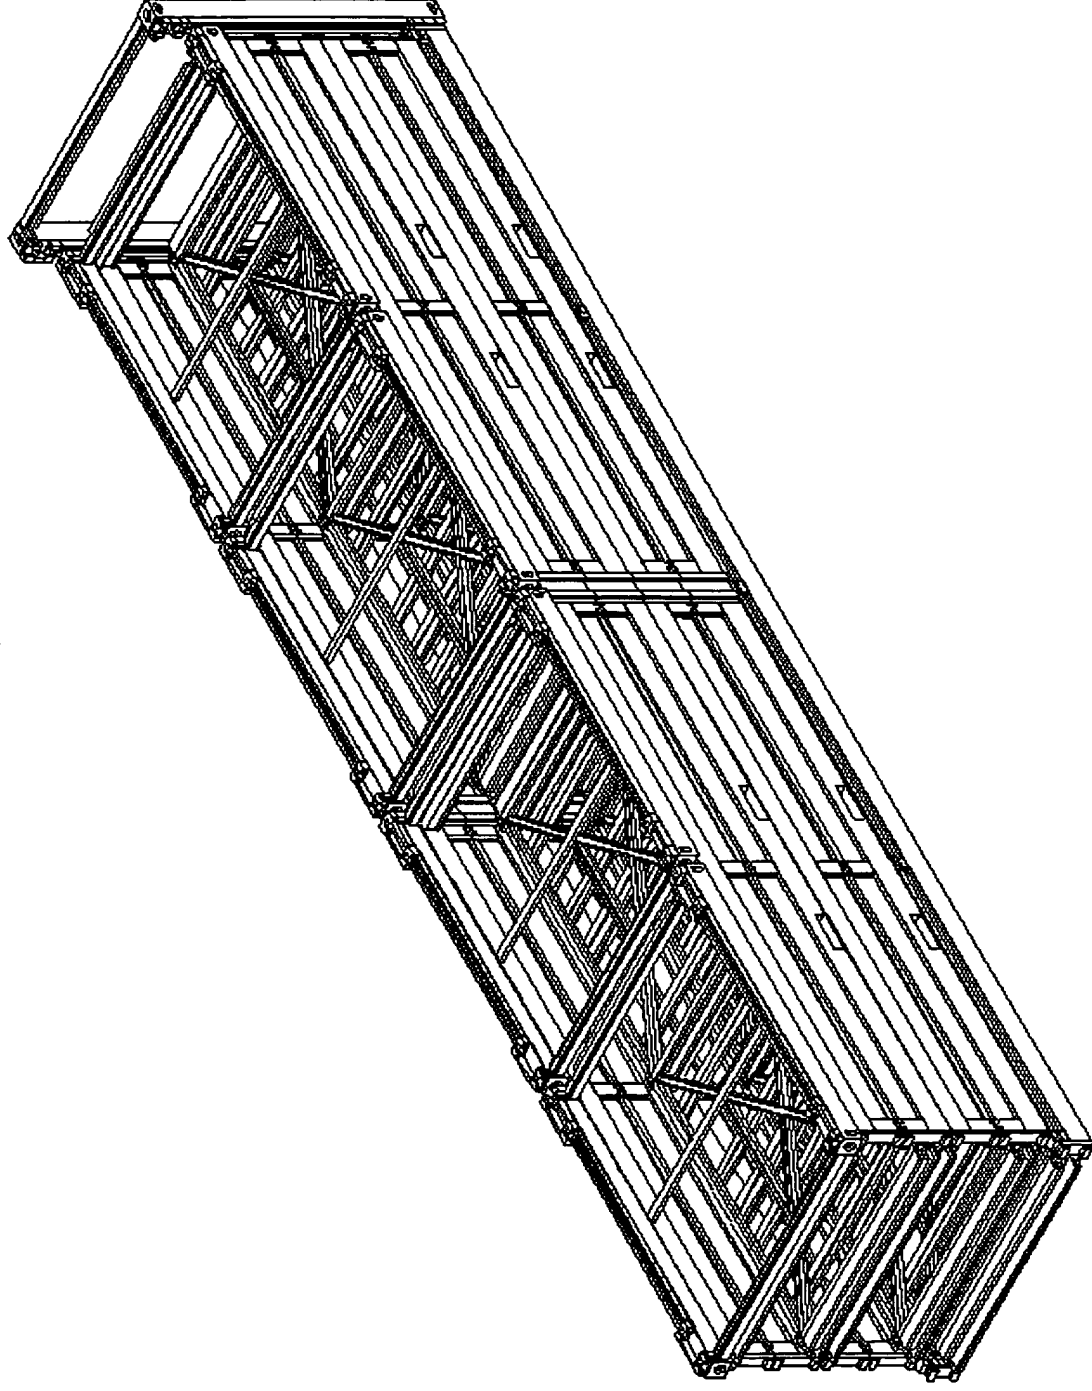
D: Step5 of disassemble and load process: The left frame of the 40 foot shipping collapsible cargo container is assembled.
